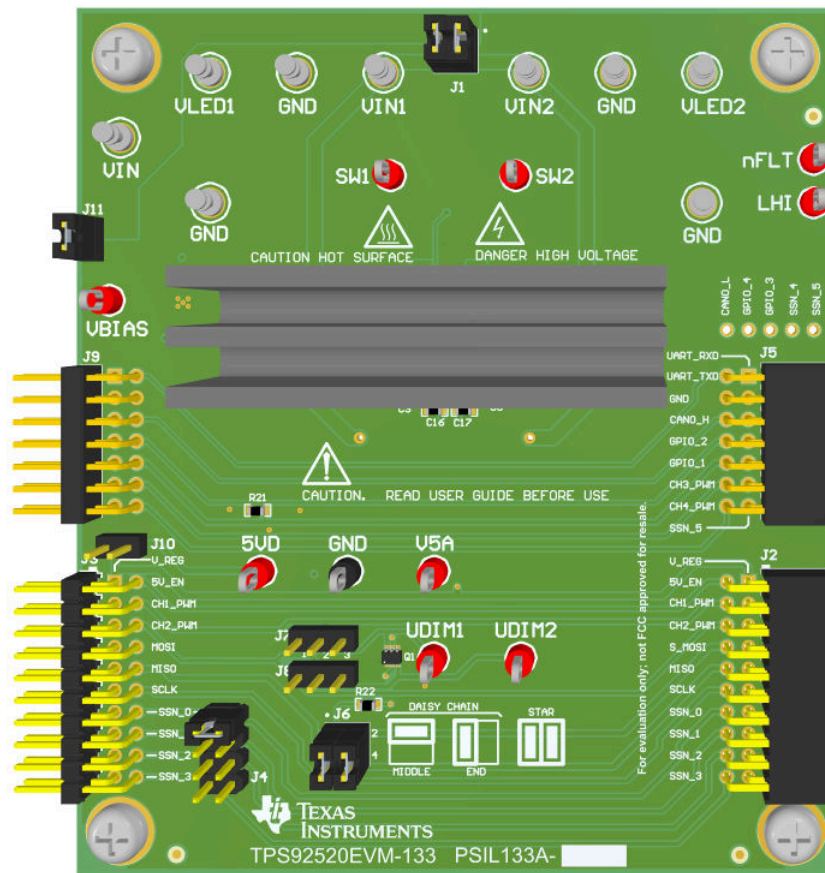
TPS92520EVM-133 Assembly Drawing
